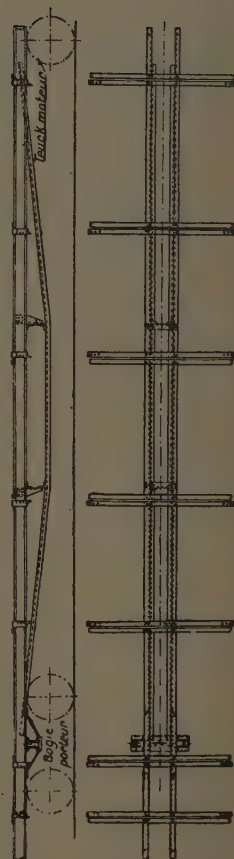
is. — Body frame. Sentinel steam rail motor coach.
